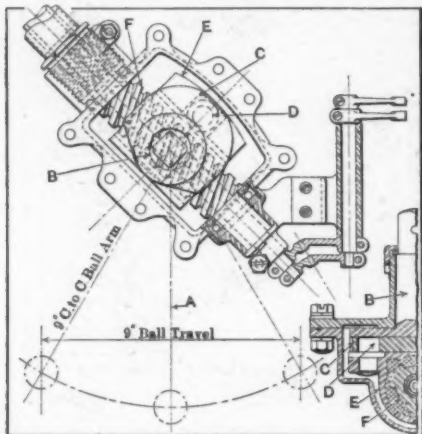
Section in two planes of the Graef-Arthur steering gear, showing relations of the parts and nice construction
